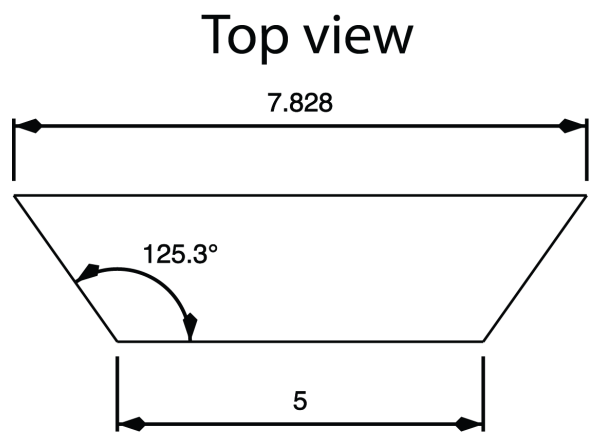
Dimensions of gasket used together with the 8/5 assembly. Dimensions are in mm.
